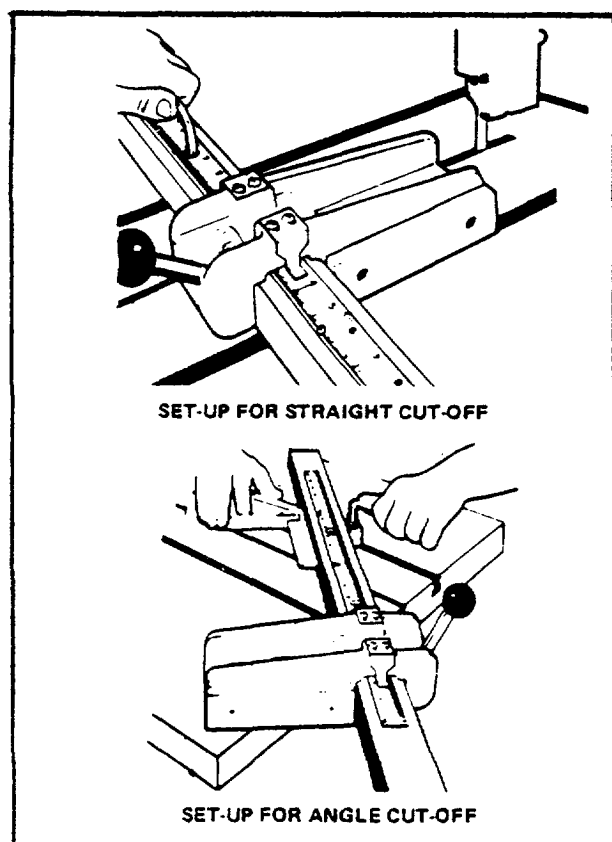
UNIVERSAL CALIBRATED WORK FIXTURE.
